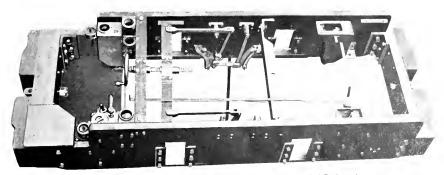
View of the Locomotive shown in Fig. 4, but without Electrical Equipment
